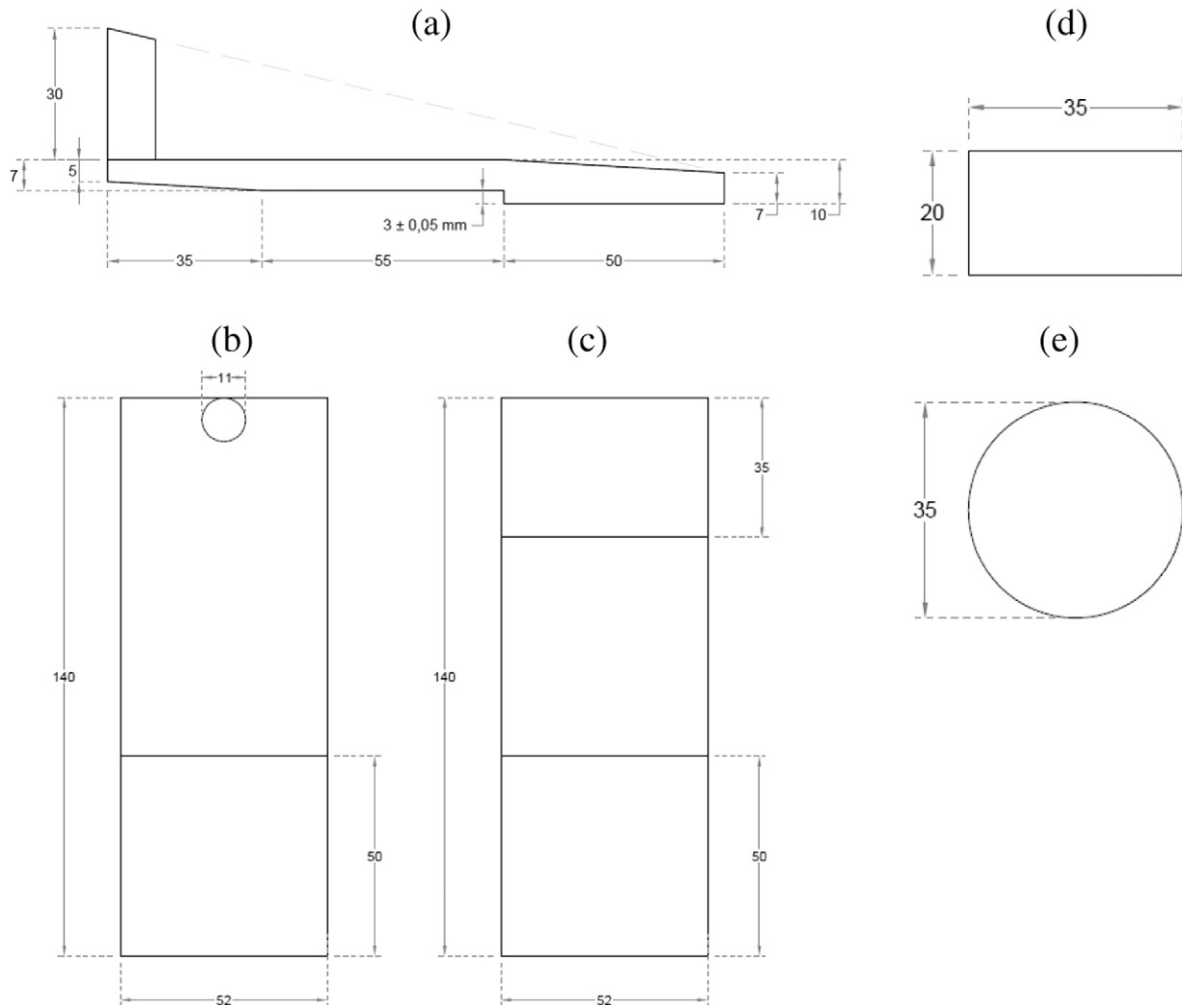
Drawings and dimensions in mm of the thread molder and the steel pushers. (a) Side view, (b) top view and (c) bottom view of the thread molder; (d) front view and (e) top view of the steel pushers.
